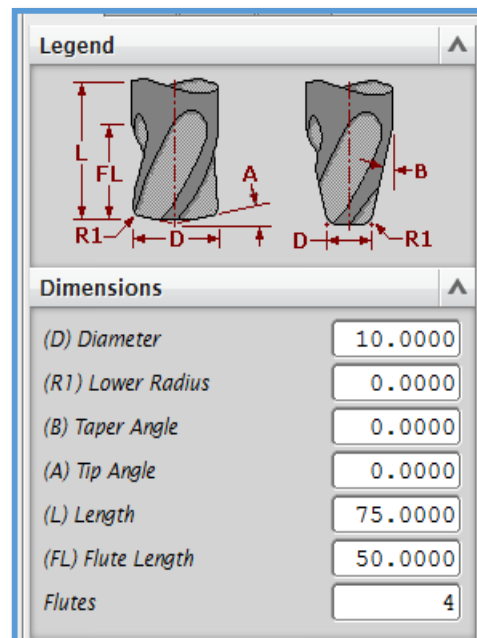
Dimension of tool for roughing phase (UG-NX10 software).
